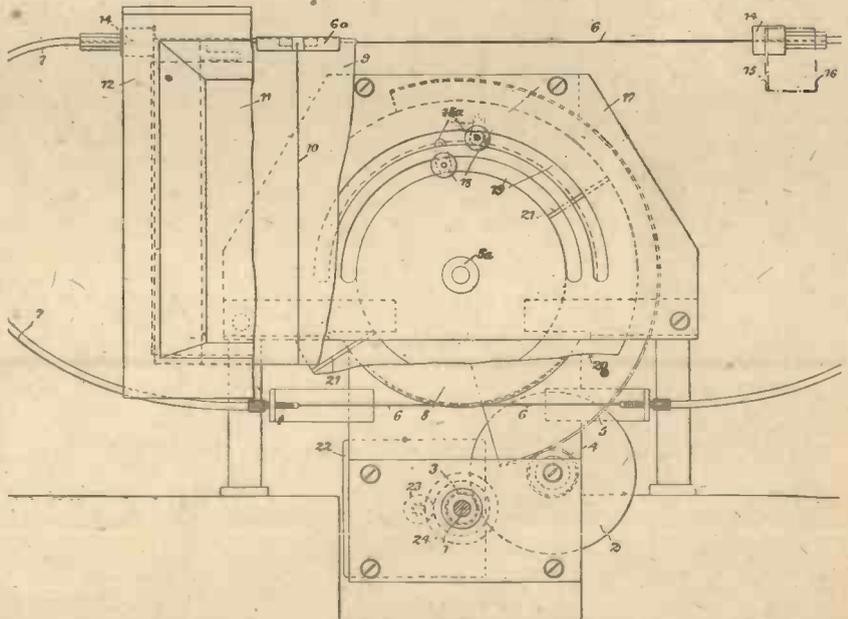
A front part-sectional view of the tuning indicator of a press-button tuner.
